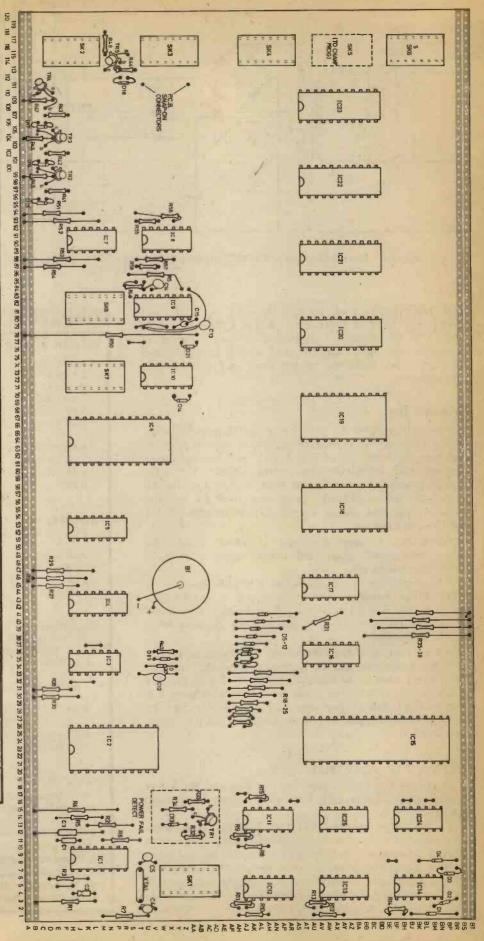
Basic CHAMP board layout. Wiring details of CHAMP complexity cannot be superimposed on this diagram and so for full assembly of this board reference to Fig. 2.3 should be made
